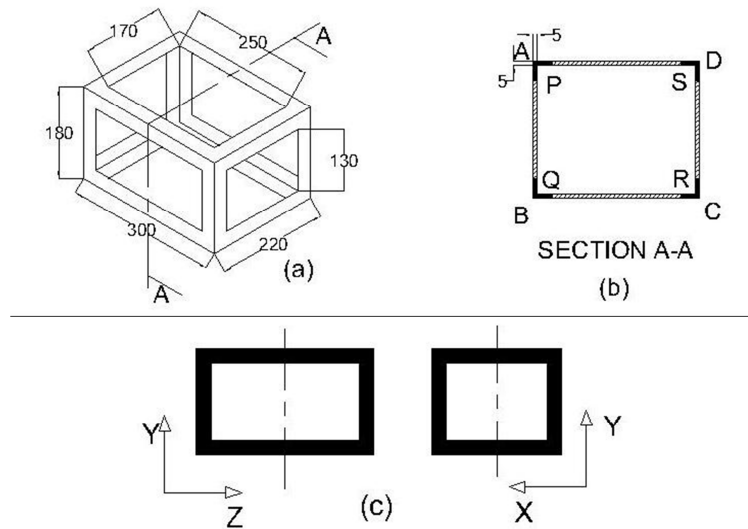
(a) Dimensions of ROV chassis; (b) Sectional View of chassis; (c) Chassis is symmetrical about Z axis and Y axis
